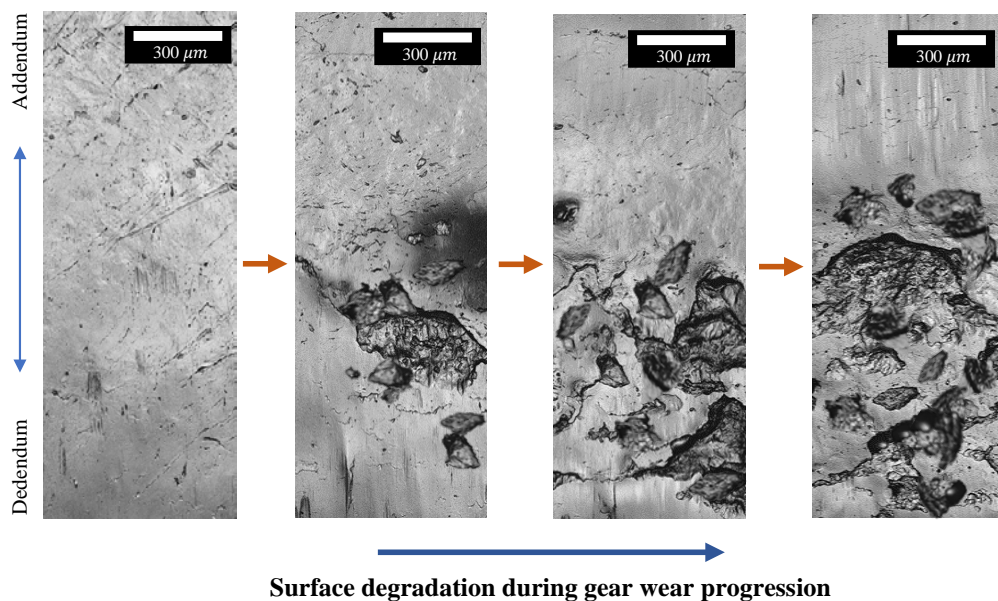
Driving gear tooth surface degradation progression induced by gear wear: one specific location
